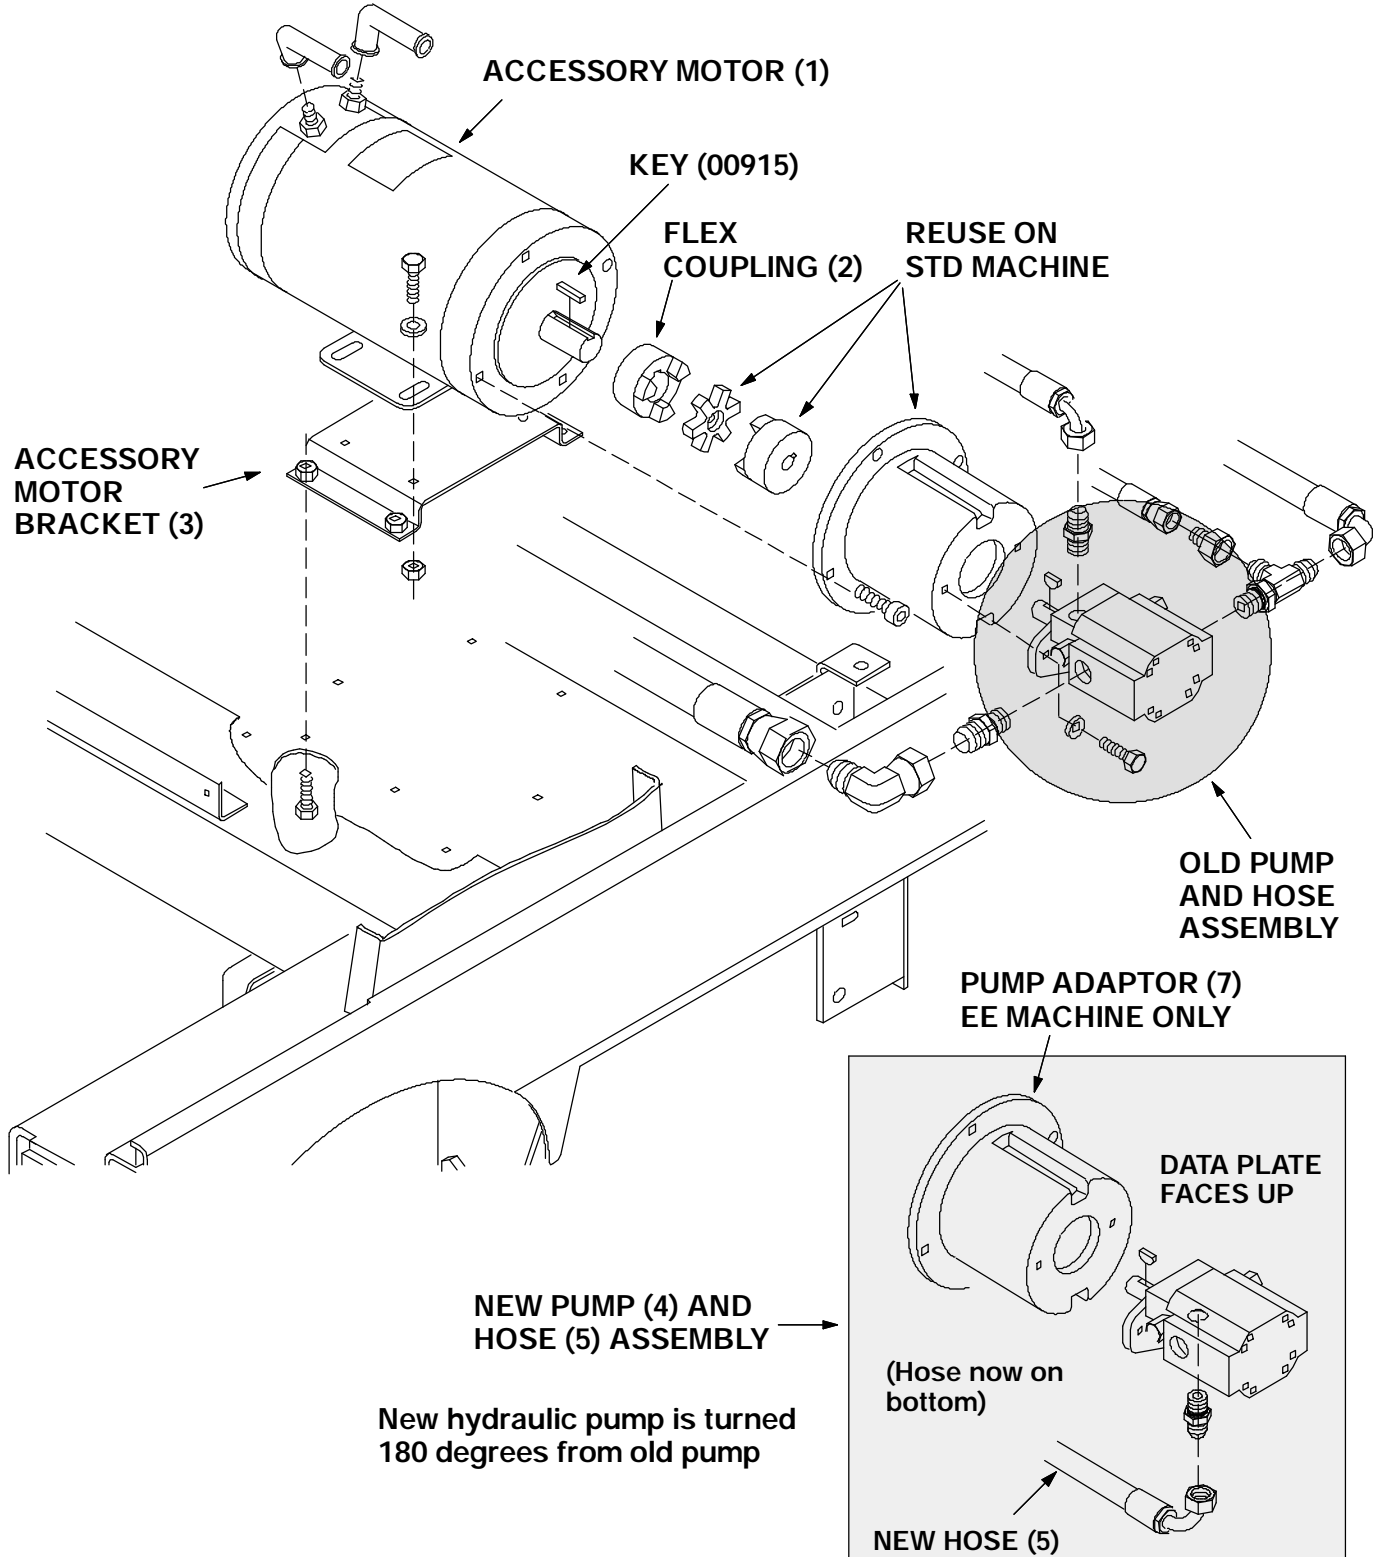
ACCESSORY MOTOR, COUPLING, PUMP ADAPTOR, AND PUMP ASSEMBLY
